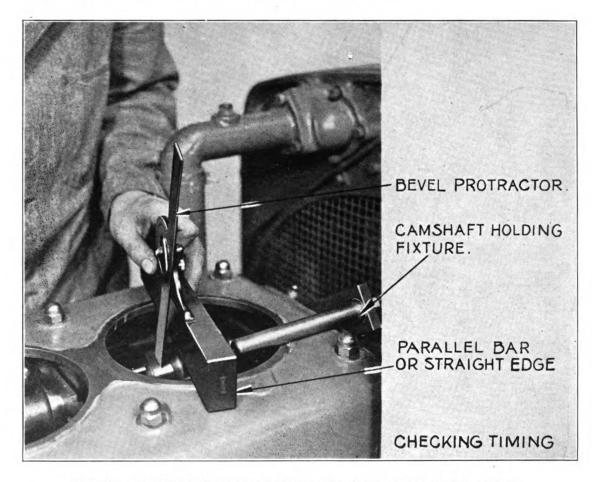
Checking Injector Cam Angle with Protractor and Square Bar
